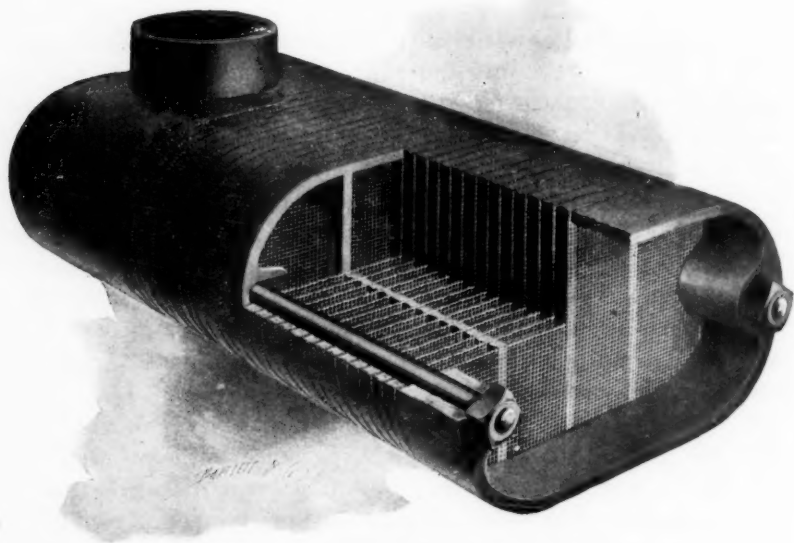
ELEVATION OF "POTTER" MESH SEPARATOR WITH SECTION CUT OUT, SHOWING INTERIOR.
